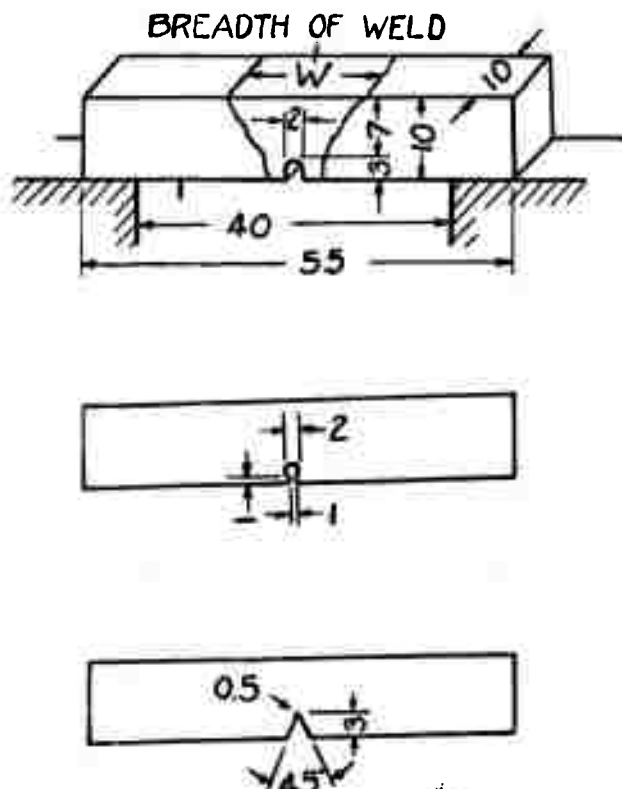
German Standard Impact Specimens for Gas and Arc Welds. Upper—Round Notch, Milled. Middle—Round Notch, Drill Hole and Saw Cut. Lower—Sharp Notch. (Dimensions in Millimeters)
